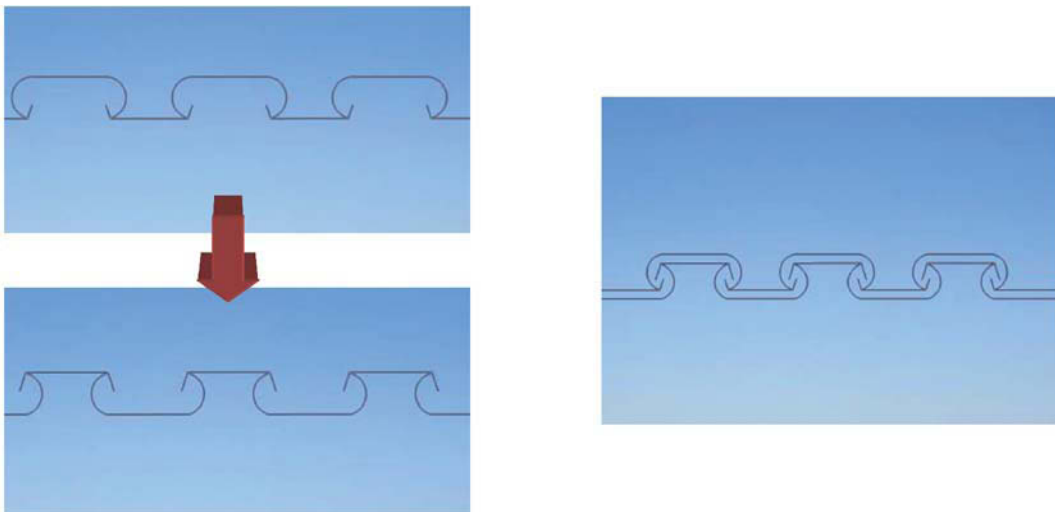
Principle of a micro-Velcro assembly. Left: two initial parts. Right: assembled unit.
